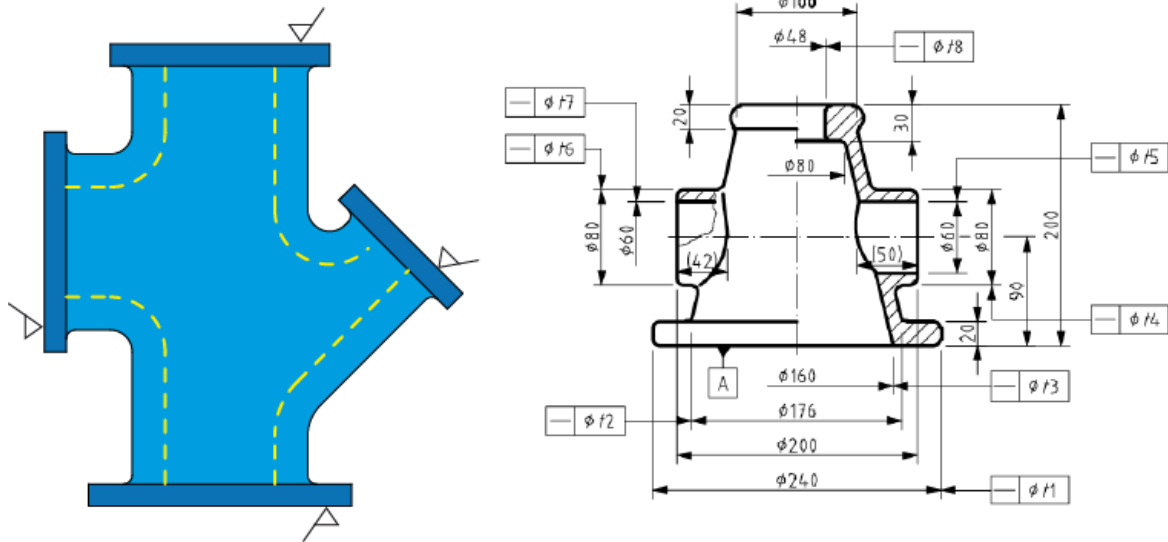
The first sketch of the SLM geometrical accuracy test component follows the example design presented in EN-ISO 8062-3.
